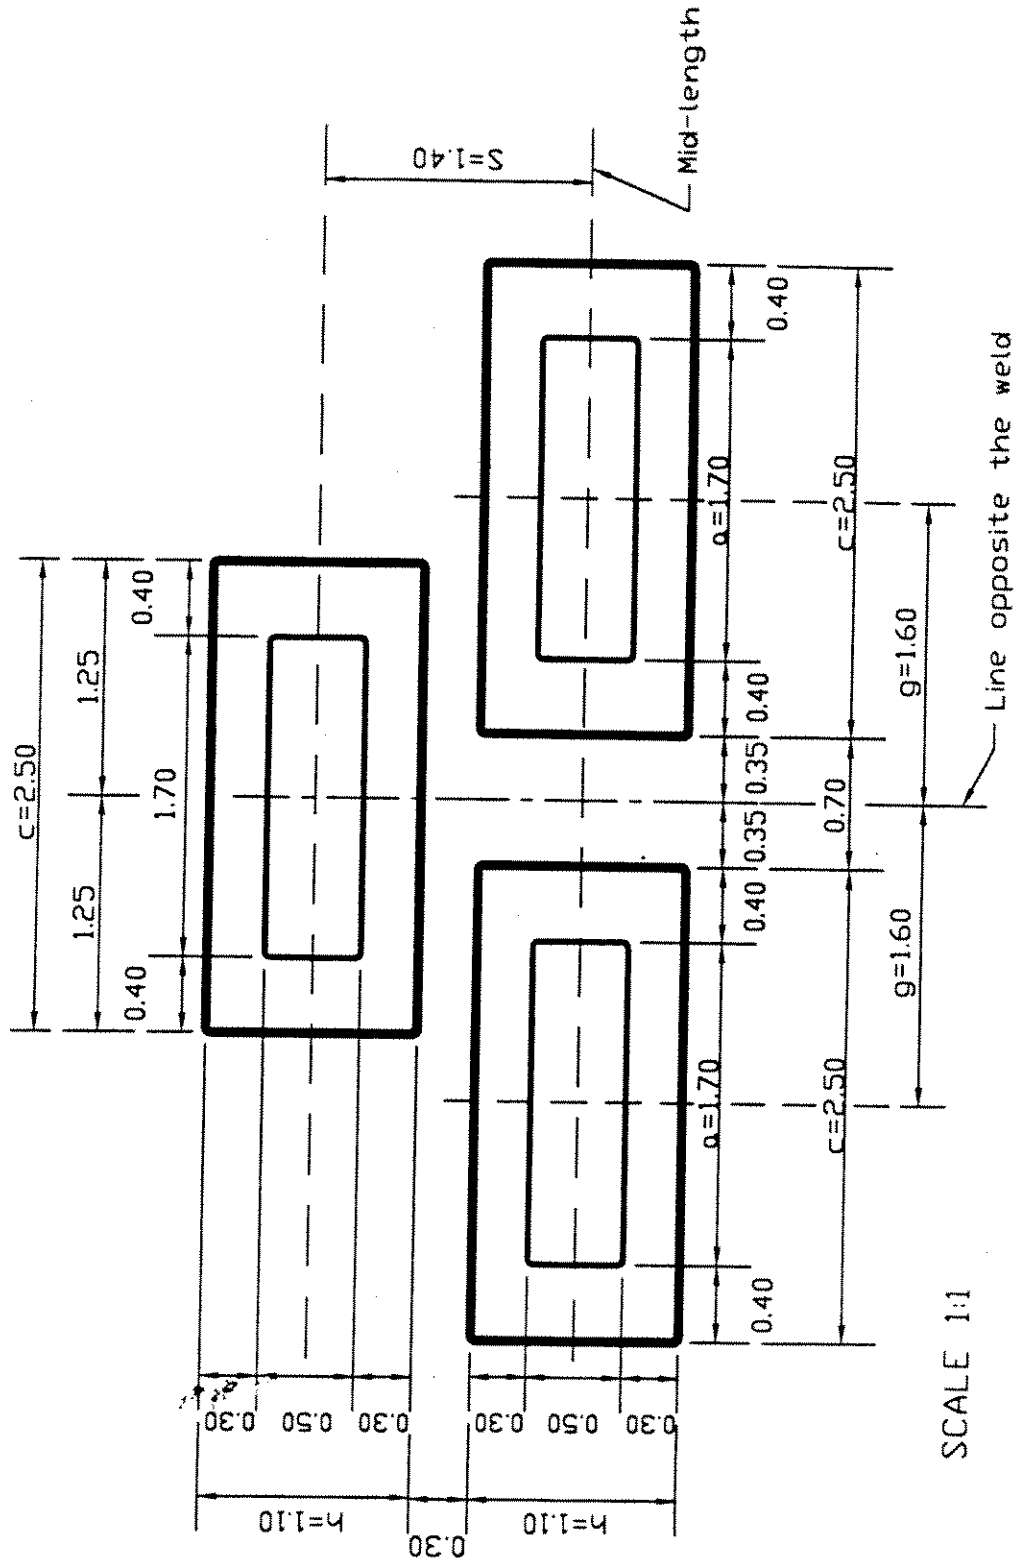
Dimensions and Arrangement of Corrosion Patches in Test Specimen MP2
